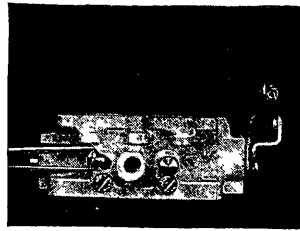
Install idle port plugs, then idle adjustment screws and springs. Set idle screws to specifications
